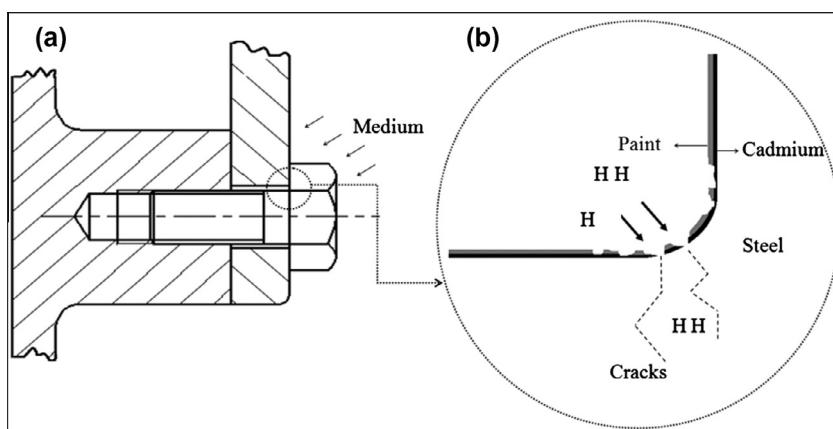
Failure mechanism; (a) screw assembly schematic representation; (b) zoom region of (HSC) cracks initiation.
